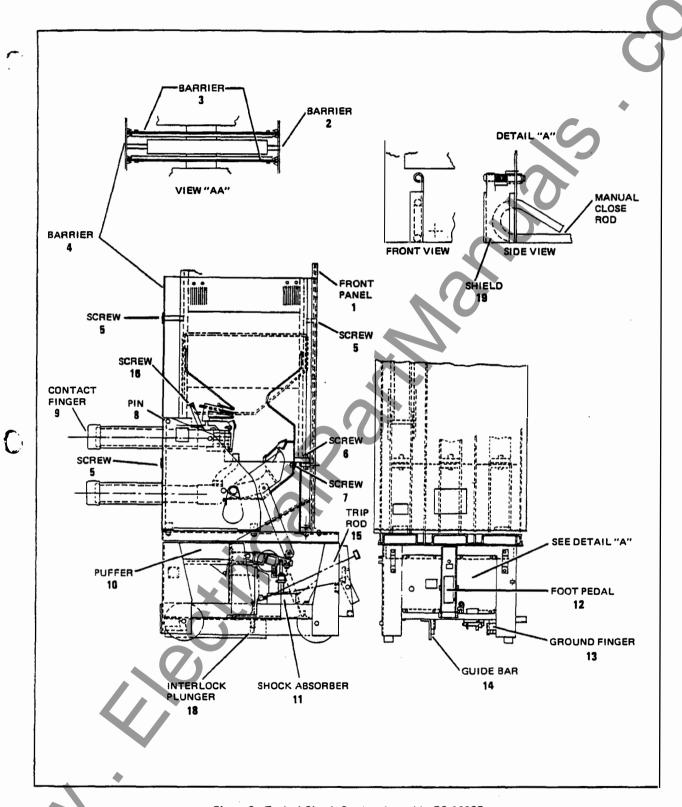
Typical Circuit Breaker Assembly FC-1000B
